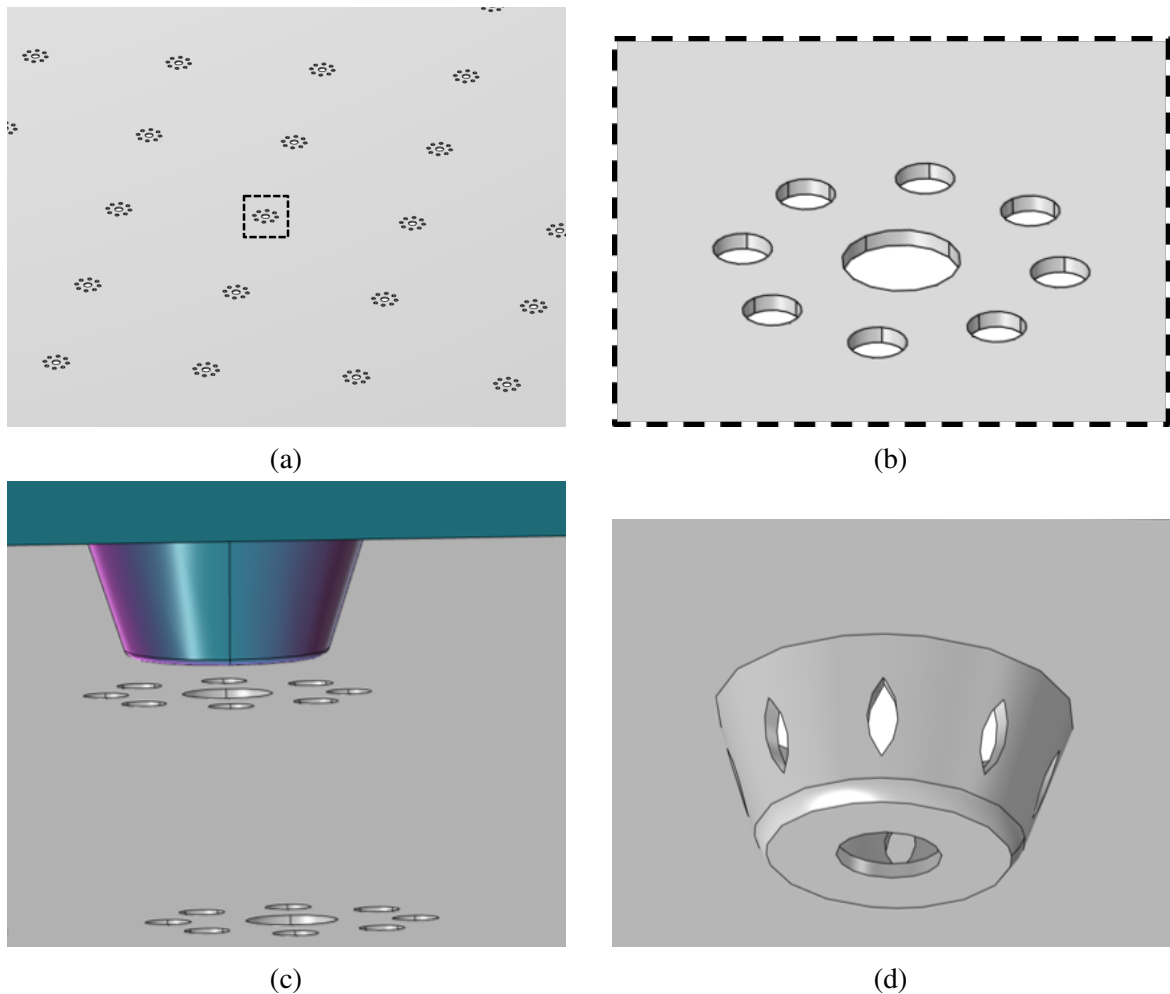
The forming process of the perforated dimples, (a) perforated thin flat plate, (b) one set of holes, (c) truncated cone-shaped punch, (d) perforated dimple
